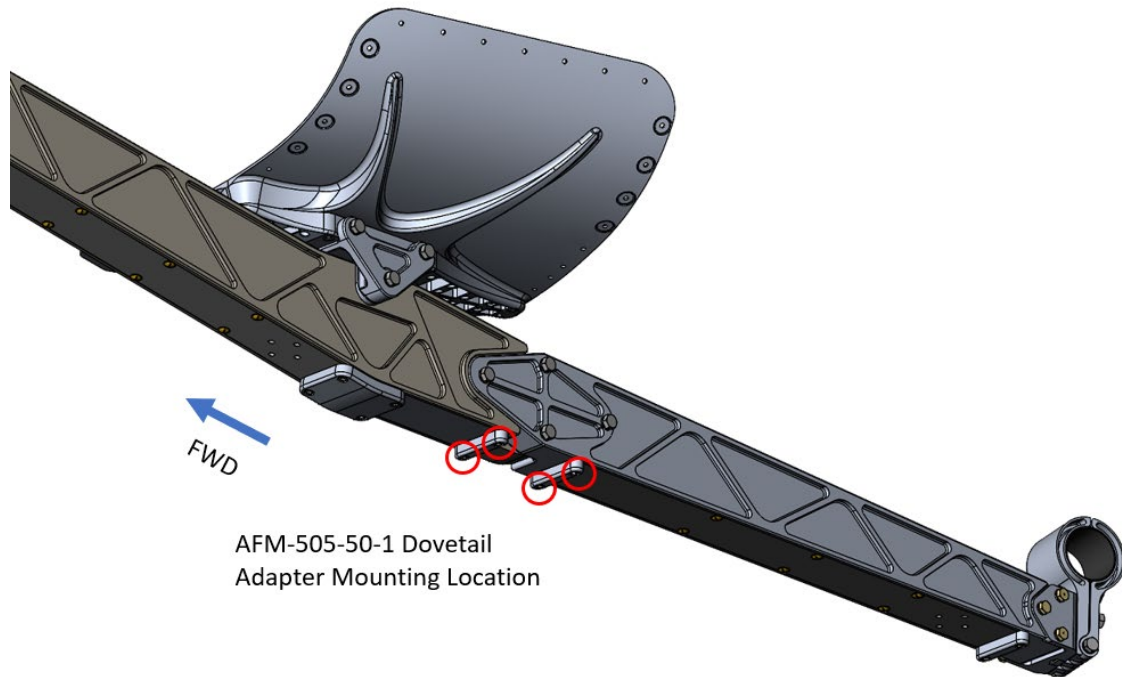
Mounting Location of the AFM-505-50-1 Dovetail Adapter
